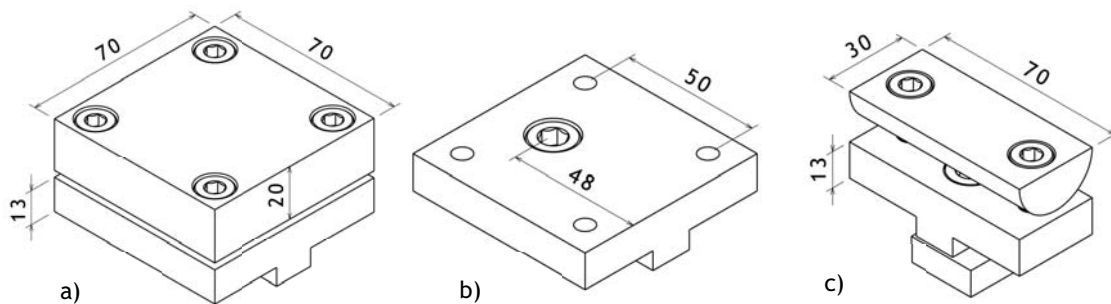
Geometry and dimensions (values in mm) of the fixtures: a) Clamping fixture; b) Lower part of the clamping fixture; c) Simply supporting fixture.
